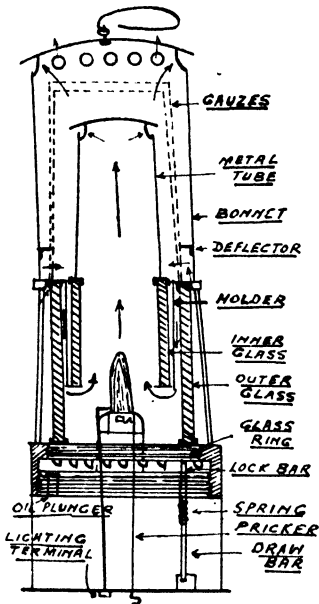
Hailwood Combustion-tube Safety-lamp.
